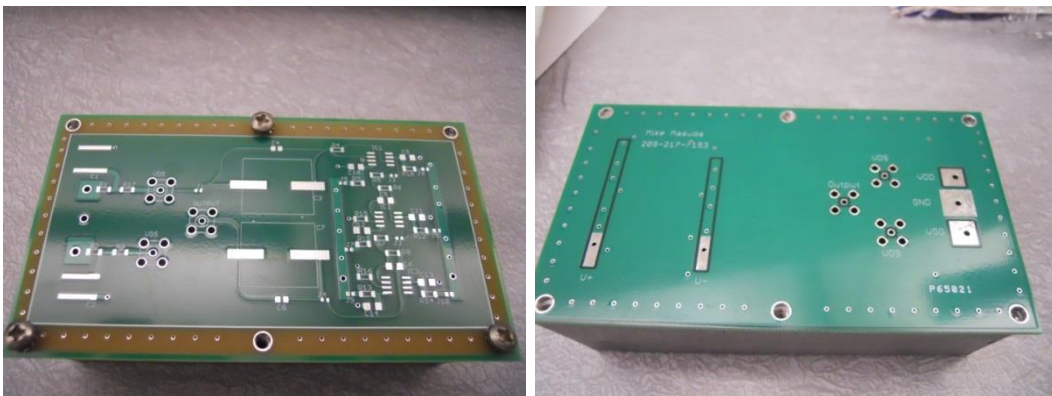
Unpopulated component side (left) and connector side (right) of Version 3 and final LFN test board.
